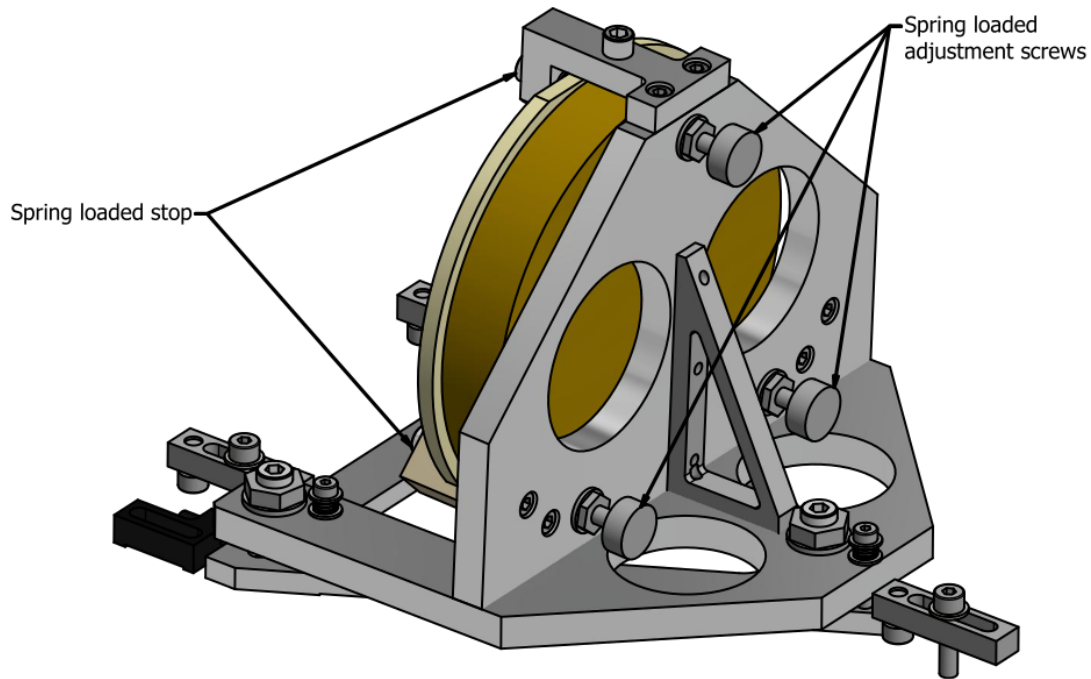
A back view of the M1 mount. The three spring loaded manual adjustment screws are visible which provide both piston and tip-tilt adjustment.
